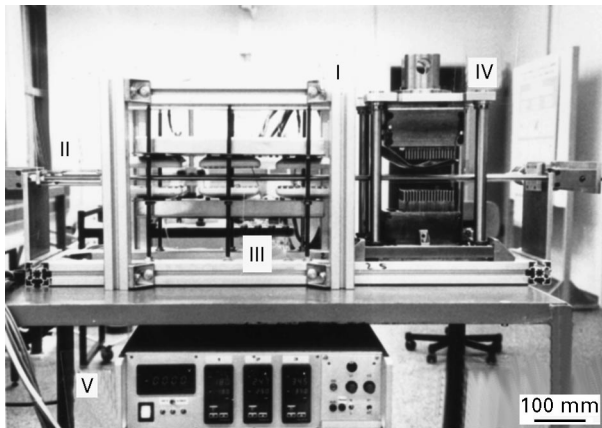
Processing line of the thermoforming apparatus: I: Machine frame; II: Loading of transport sledge; III: IR-heating zone; IV: Needle-bed mould; V: Control system.
